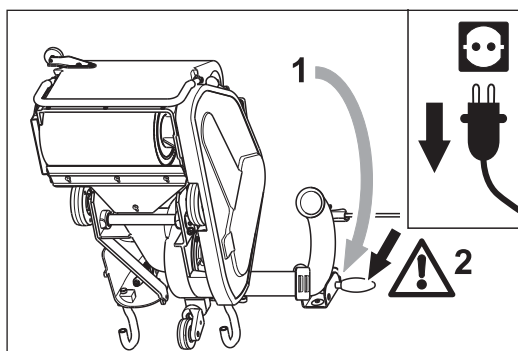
Tilt the machine backwards (1). Ensure that the machine is standing securely (2)!
